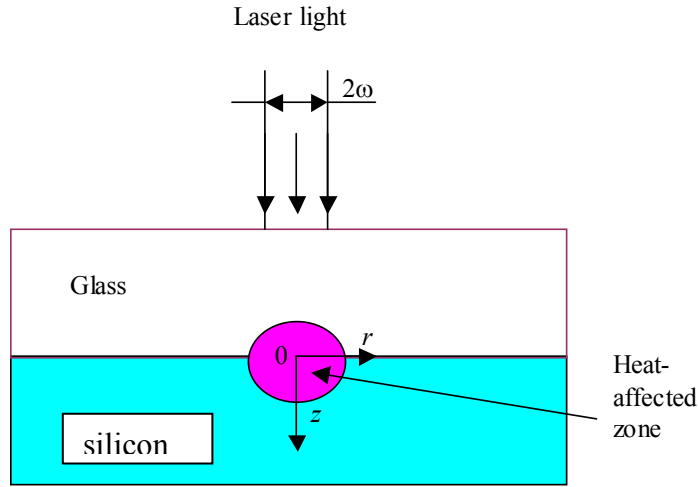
Schematic representation of the laser welding process of the system.
